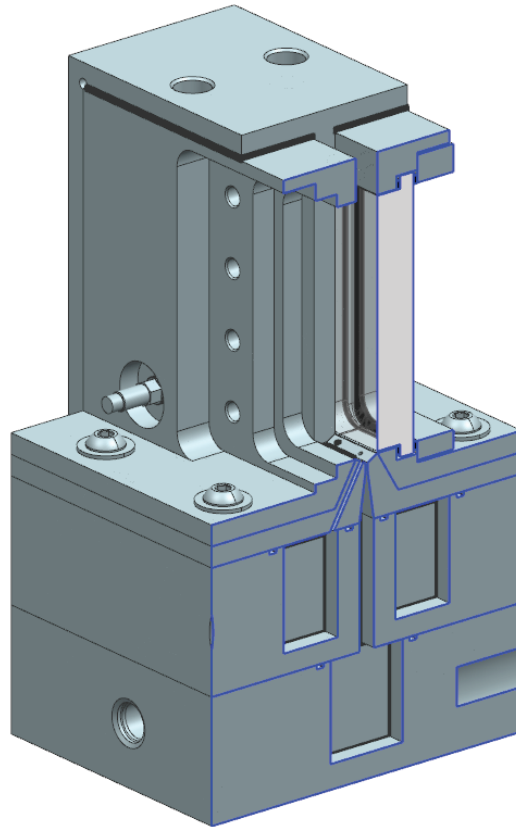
Stainless steel inserts in the oxidizer manifold, fuel manifolds, injection plate, and combustion chamber to relocate the circulation zone to the window A region.
